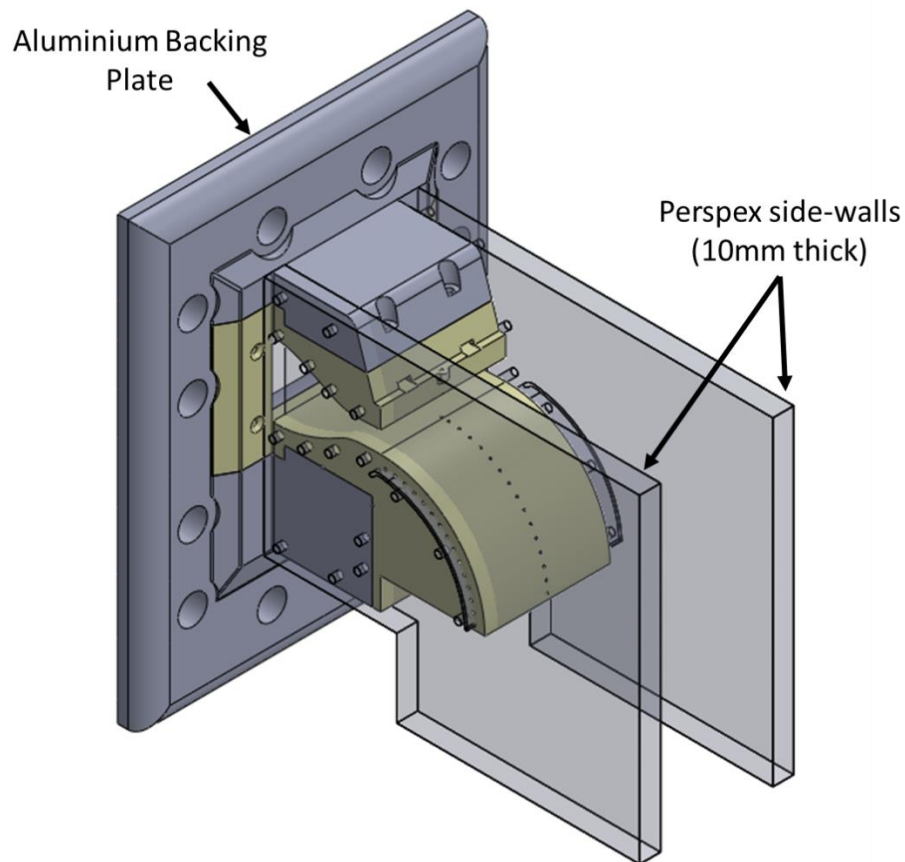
Full assembly of 3D SLA printed nozzle section (AIV1HR02NPR3) with Perspex side-walls and aluminium backing plate
